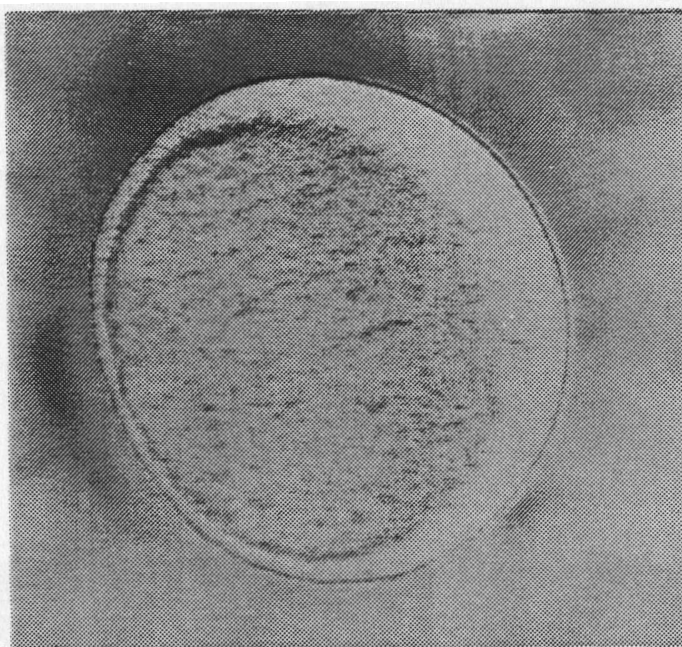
Fracture Surface of Sample No. 3. 36X.
